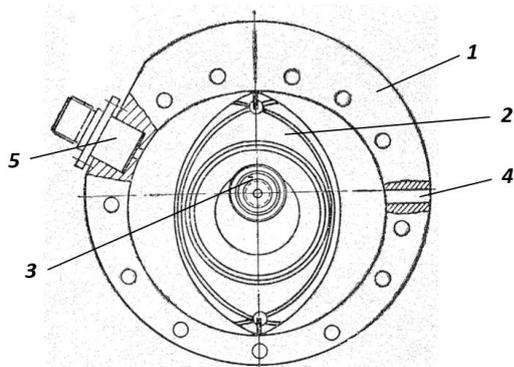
Schematic diagram of the trochoidal compressor: 1 – case; 2 – rotor; 3 – crankshaft; 4 – suction channel; 5 – discharge valve
